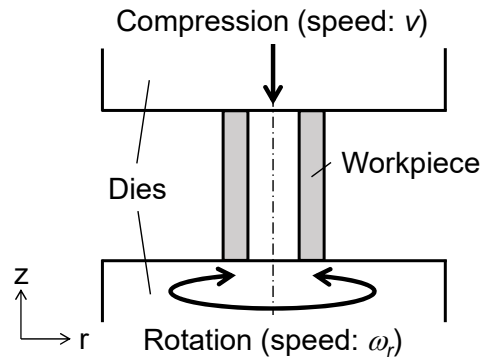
Schematic illustration of upsetting with torsional oscillation of hollow cylindrical workpiece with parallel flat platens.
